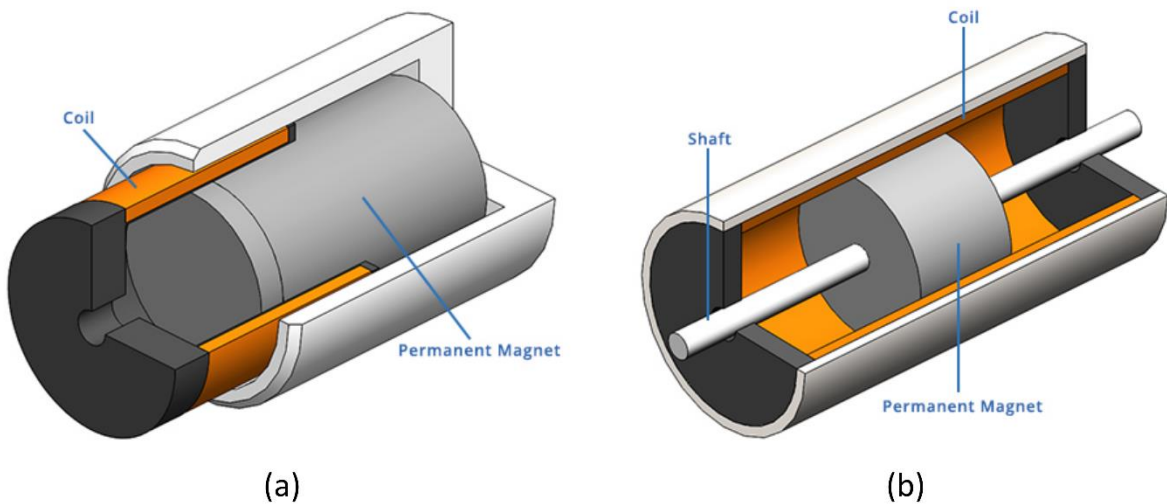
Voice coil motor with (a) Moving coil (b) Moving magnet [86]
